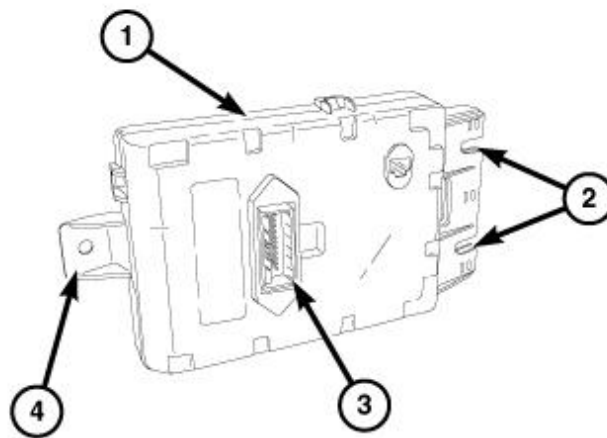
A/C Heater Module, Mounting Tabs & Connector Receptacle
